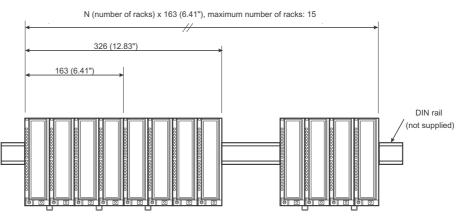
Dimensions of SFC901A rack assembly with mounted modules
